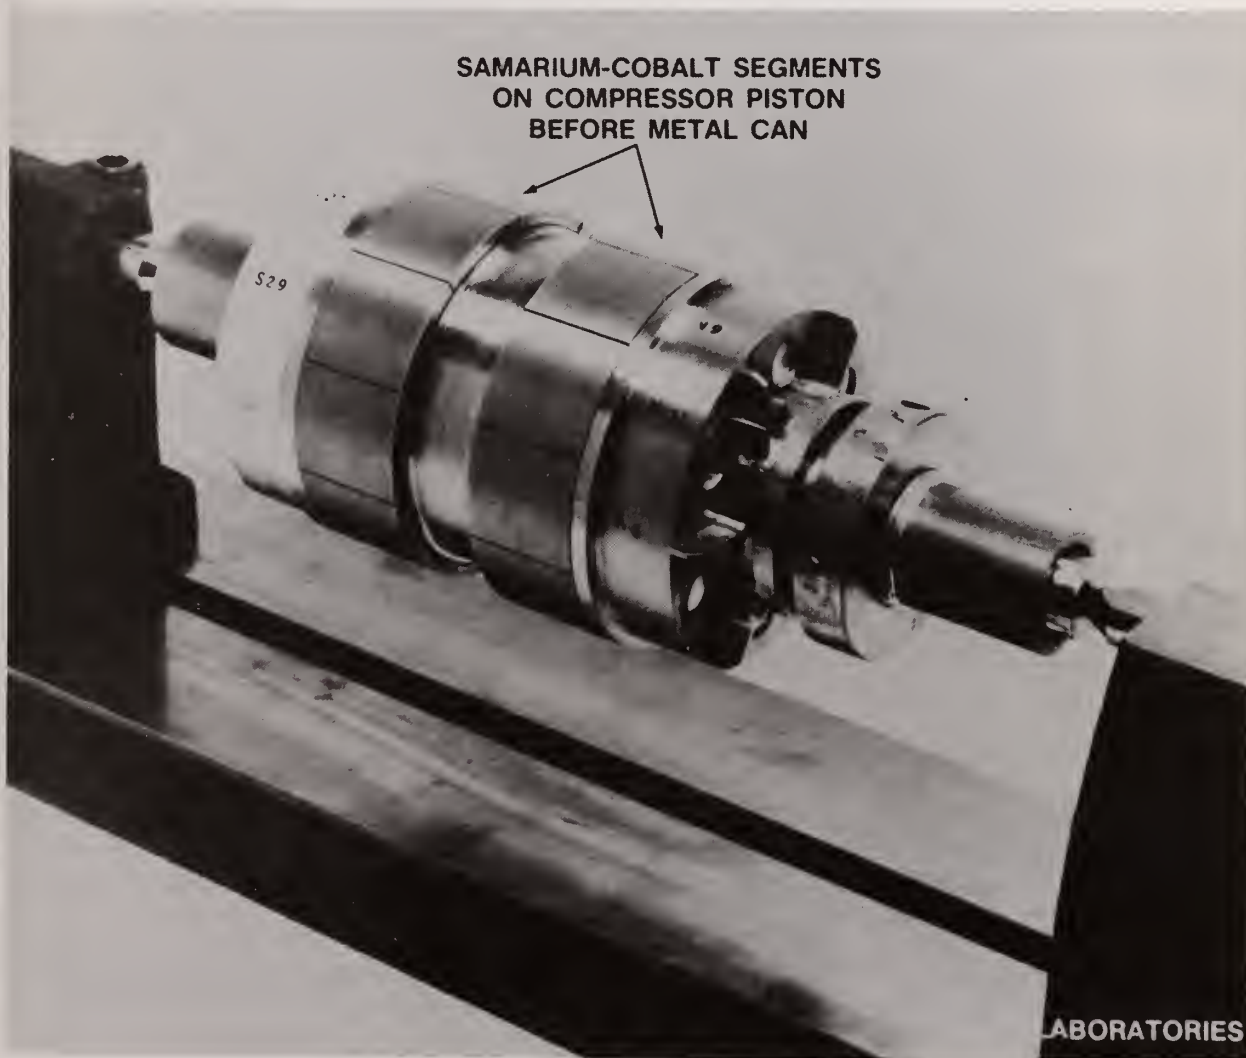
Piston motor armature under construction with magnetic segments mounted.
